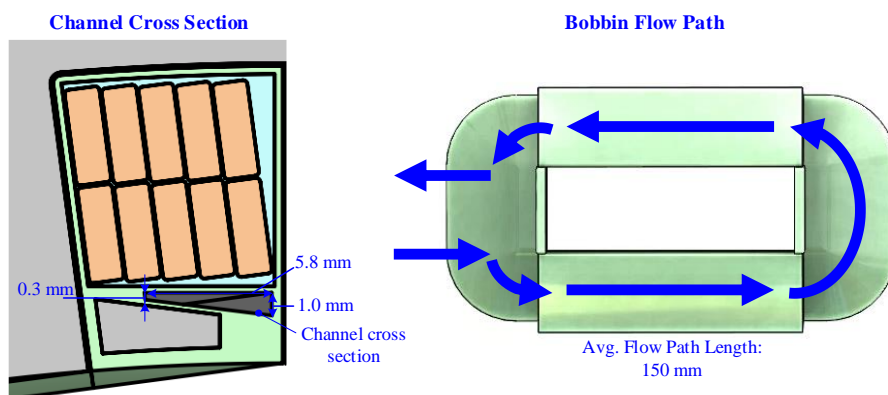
Winding cooling bobbin channel dimensions and flow path.
